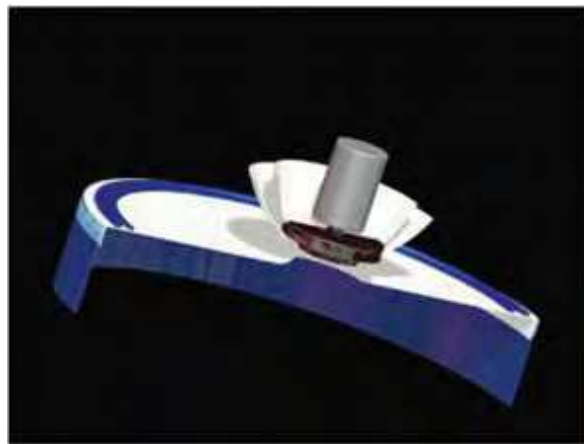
Exploded view of the vacuum chamber with flexible bristle skirt seal.
